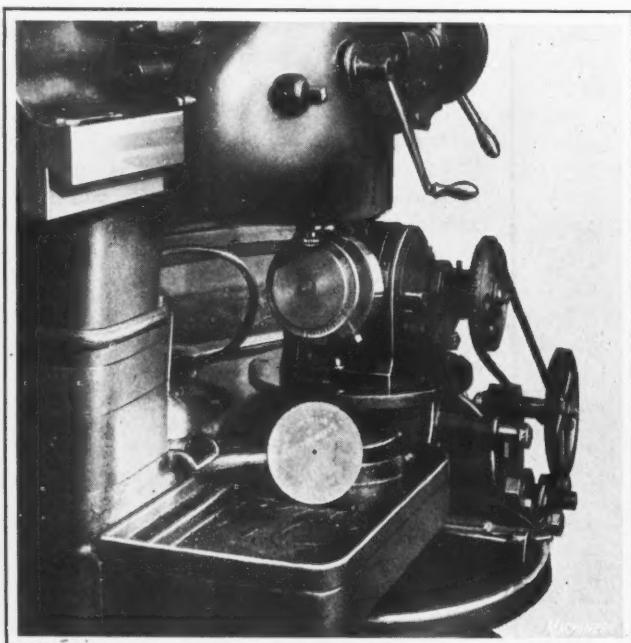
Set-up of Fellows Gear Shaper for graduating Dial Faces by the Roll Method
